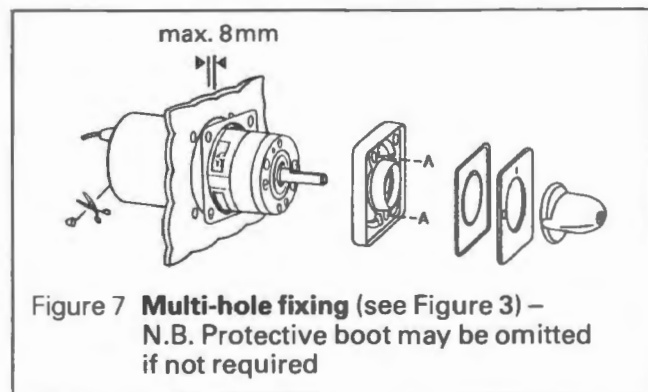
Multi-hole fixing (see Figure 3) – N.B. Protective boot may be omitted if not required
